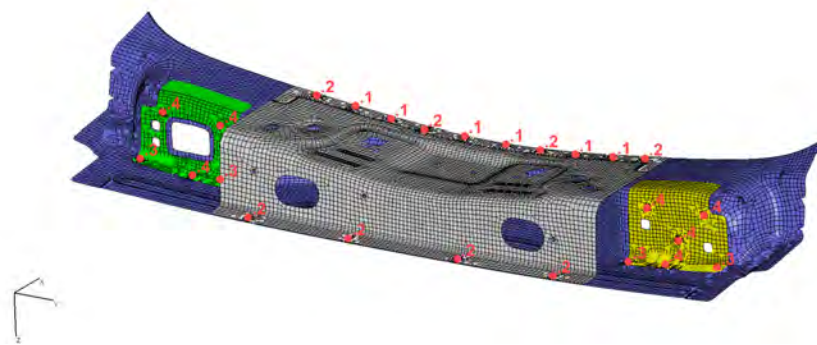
Welding sequence according to current assembly procedure.
